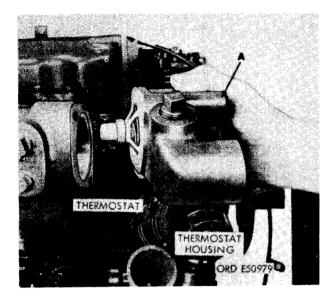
REMOVING OR INSTALLING THERMOSTAT HOUSING AND THERMOSTAT.
